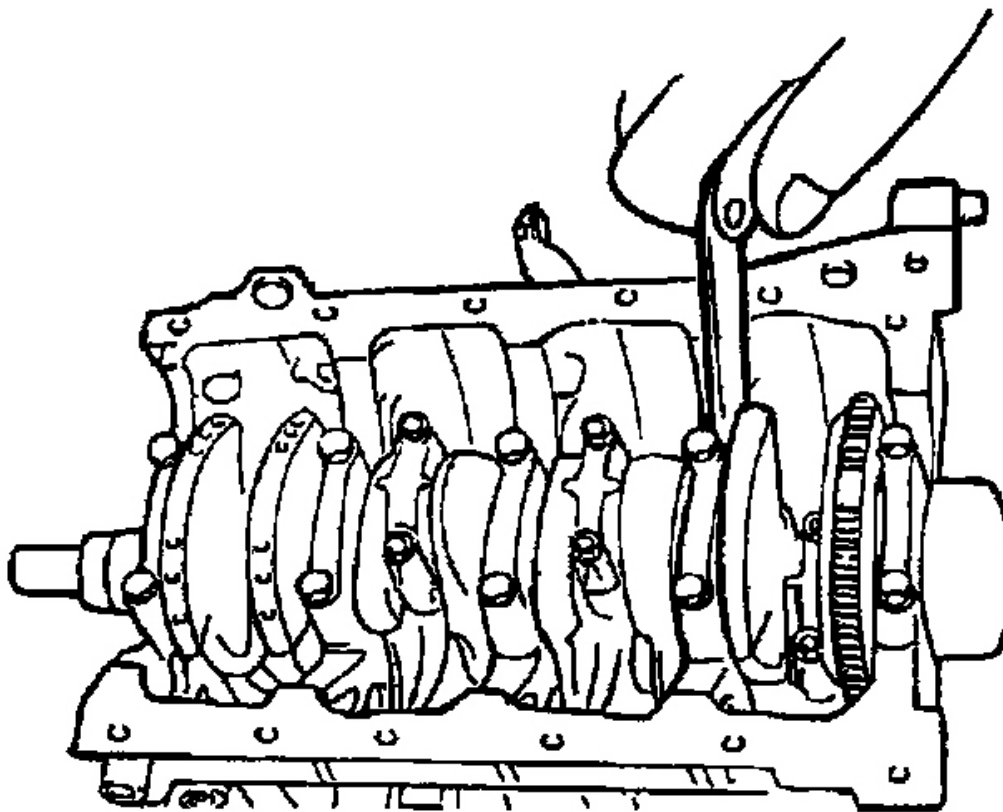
Identifying Cylinder Number Mark On Connecting Rod
